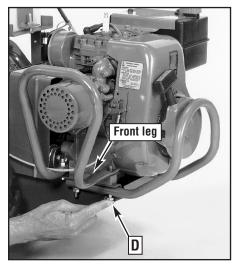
Insert screw (D) up through front bumper, engine support bracket, engine base and front leg of side bumper. Loosely add a lock washer and nut.
